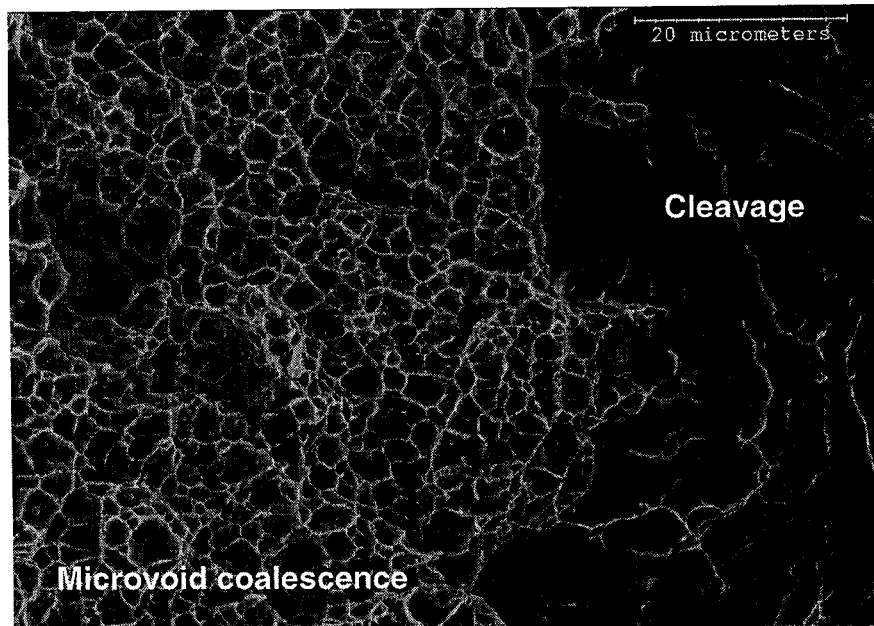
Microvoid Coalescence on Fracture Surface of Test Specimen T2-3
